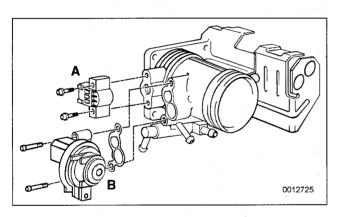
M44 engine: Throttle housing showing (A) throttle position sensor (TPS) and (B) idle speed control valve.
